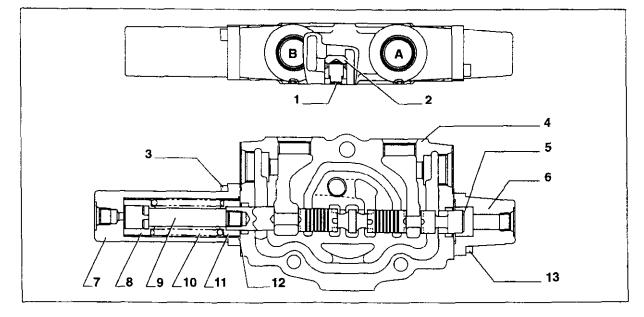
Configuration of "Booms" section of control valve (piloted)
